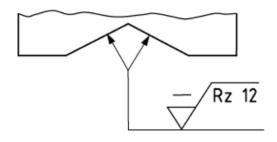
CAD-5 Graphic symbol on workpiece of top view that readable from bottom (ISO 21920:2022, 2022)
